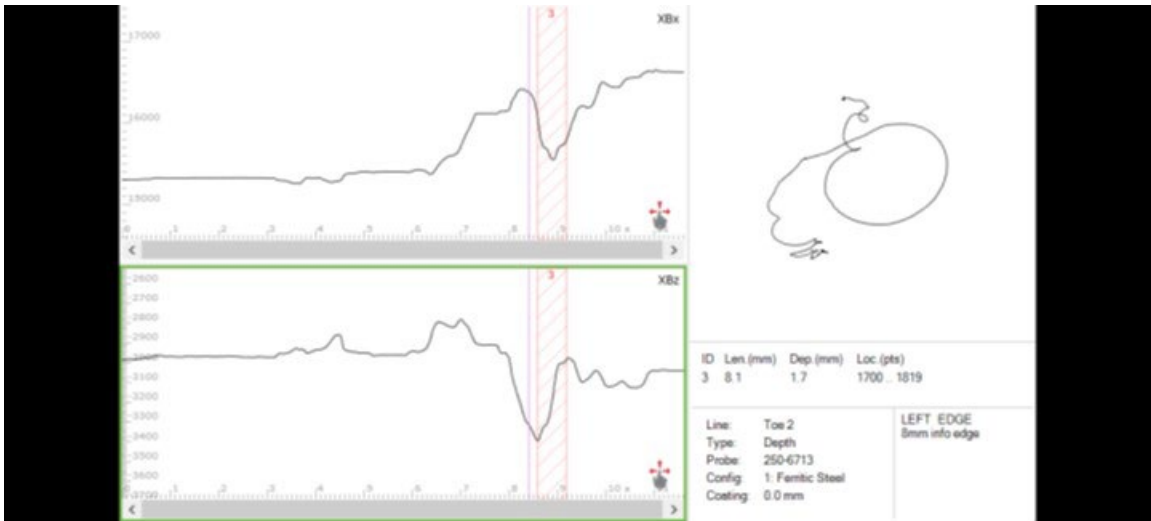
ACFM scan data of Flaw 1 for fillet weld TICI-P2 panel
